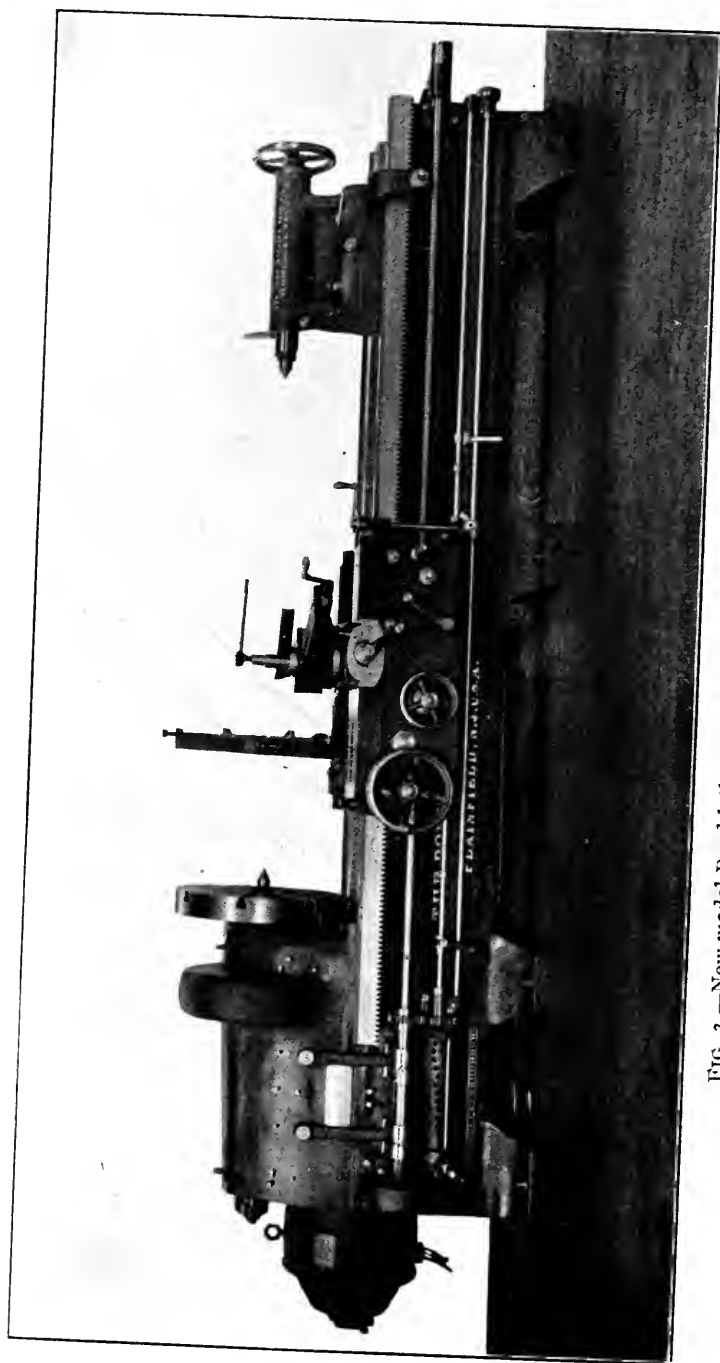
New model Pond lathe equipped with Westinghouse type S motor.
